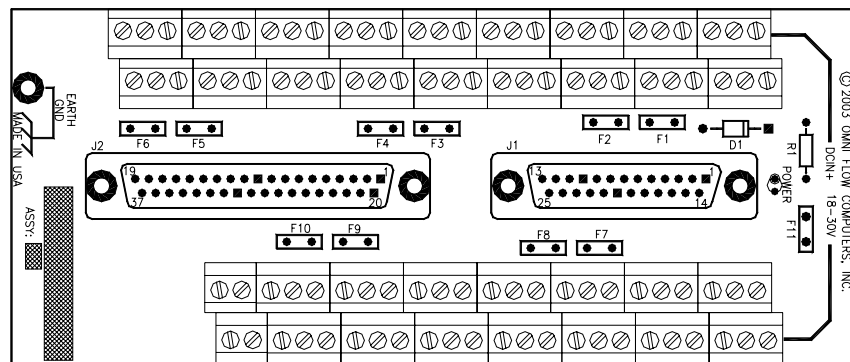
LMC I/O Terminal Board. (P/N 21300003)
